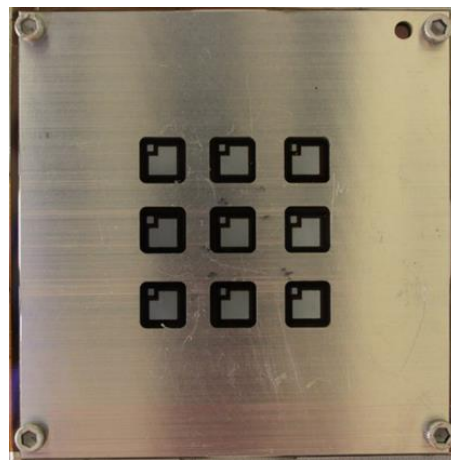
Assembly used for Ti/Ni/Ag E-beam evaporation on gate and emitter of Si-IGBT devices
